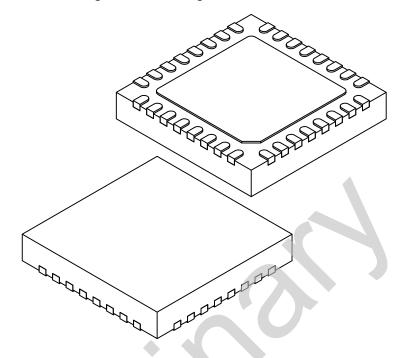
PIC32CX1012BZ24032 SoC Package Outline Drawing
